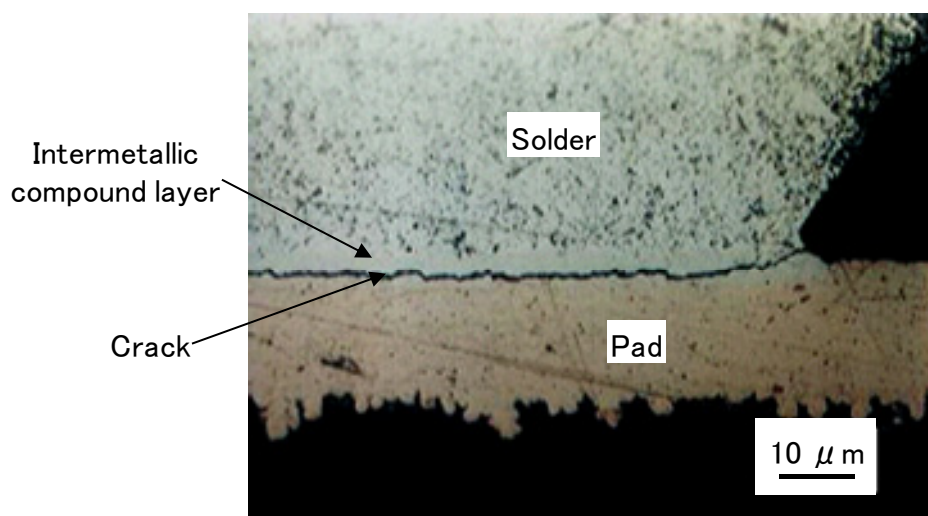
9 Crack at the lead free solder joints.
